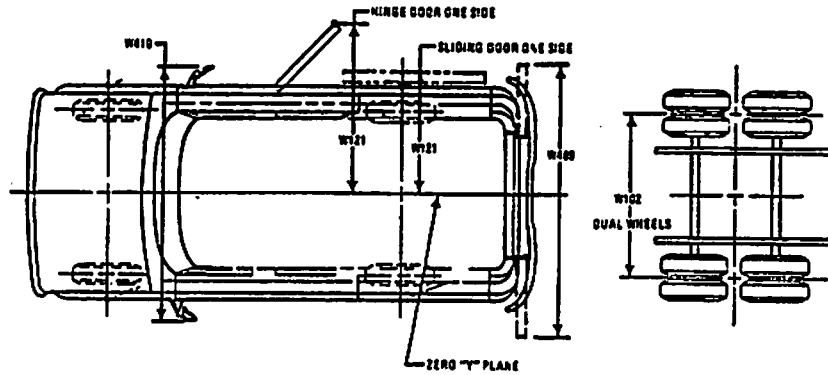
EXTERIOR DIMENSIONS, WIDTH—TRUCK
